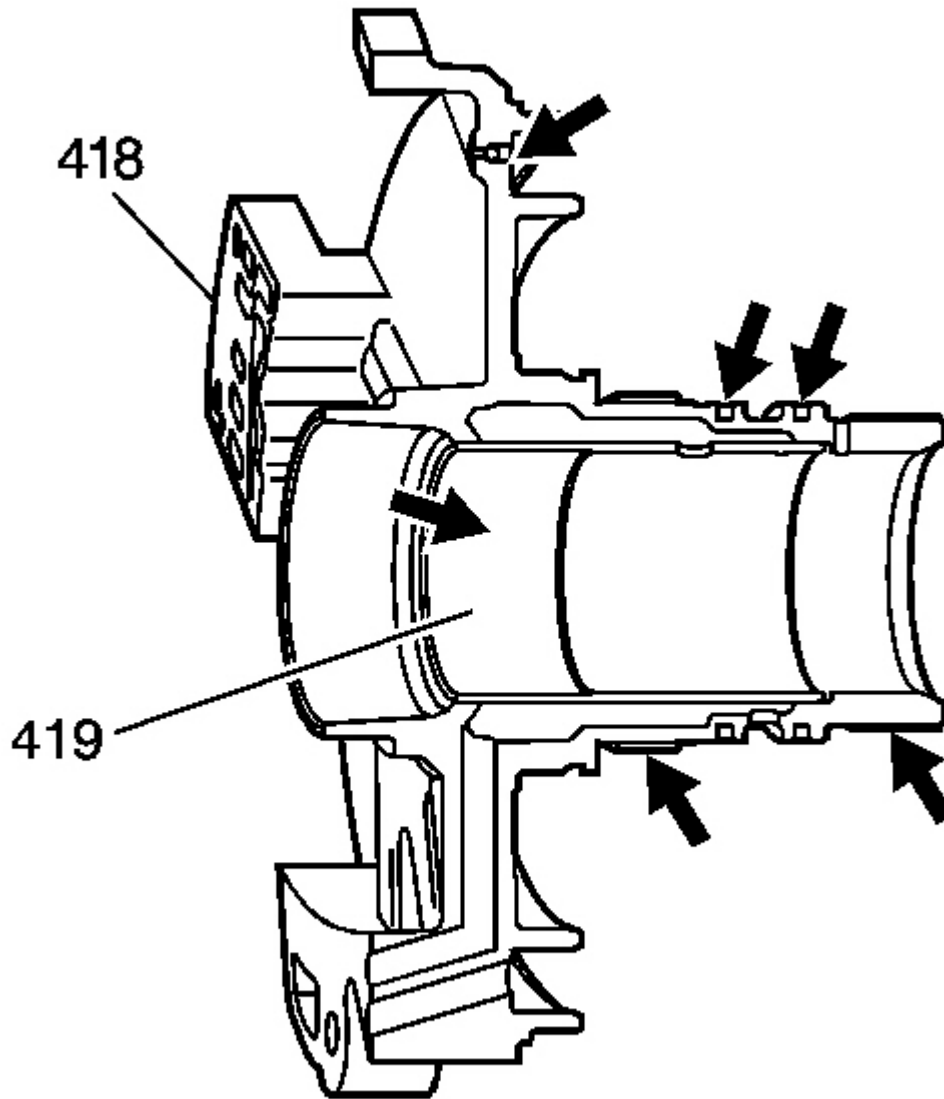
View Of Inspection Areas On Oil Transfer Sleeve
